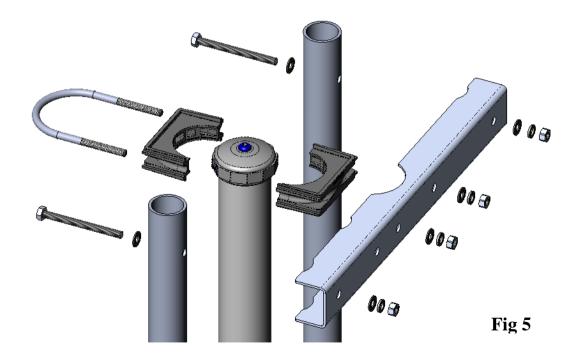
Exploded view of (PEANUT TYPE) Steering pole assembly connecting to the cap of antenna with U-bolt & fasteners.
